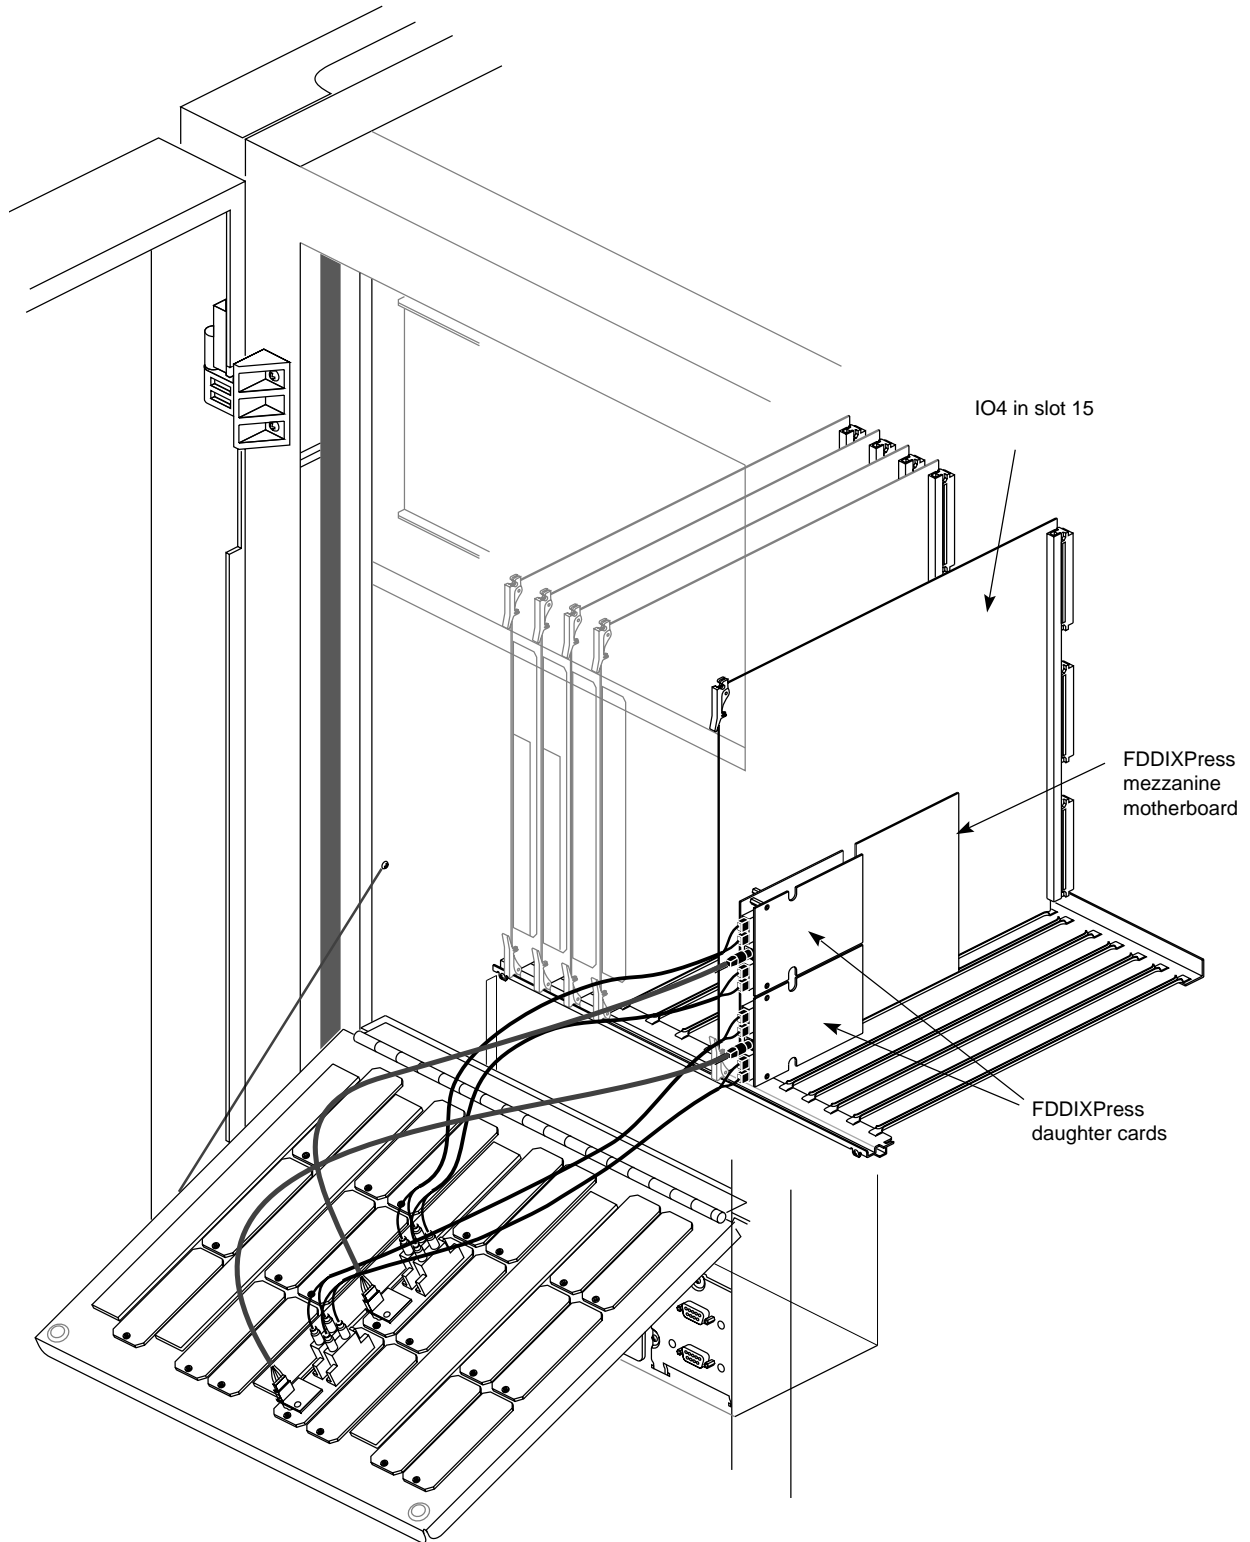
Challenge XL Rackmount Internal Cabling Example
